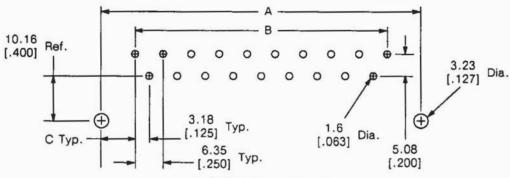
PC Board Layout for Square Grid Pin or Socket Headers
